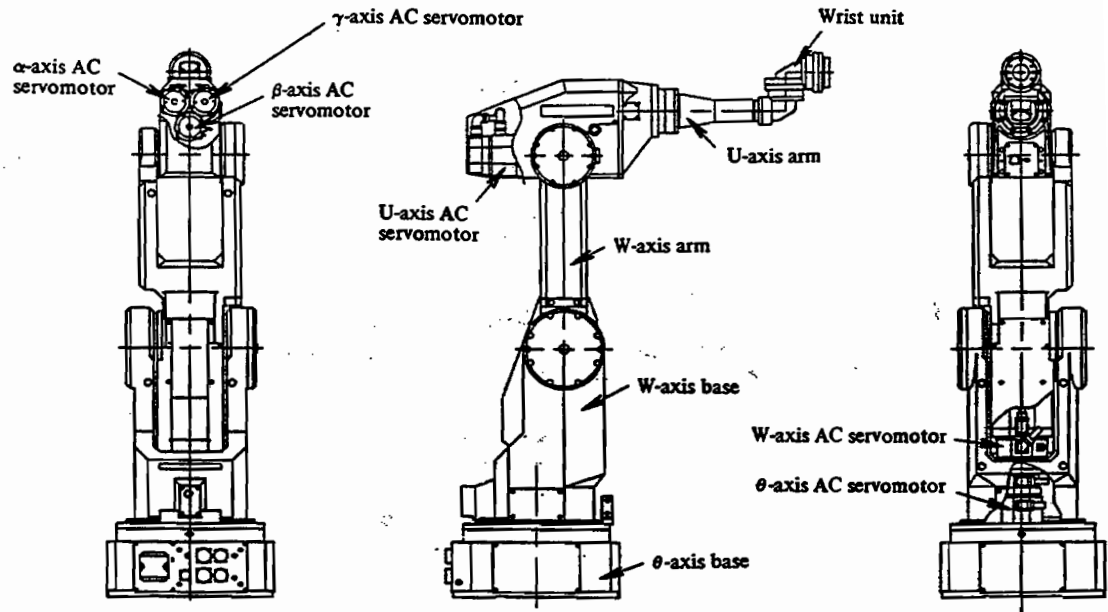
(a) Mechanical unit configuration (S-700 offset wrist)
